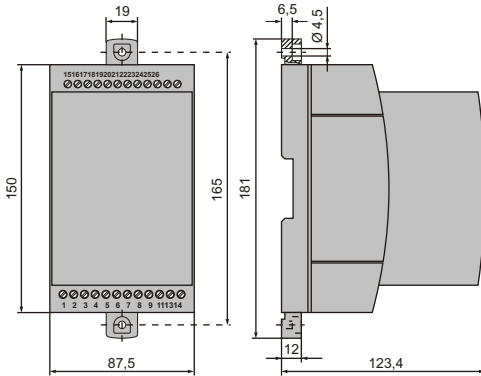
RISH Ducer M01 in housing T24, screw hole mounting brackets pulled out.
